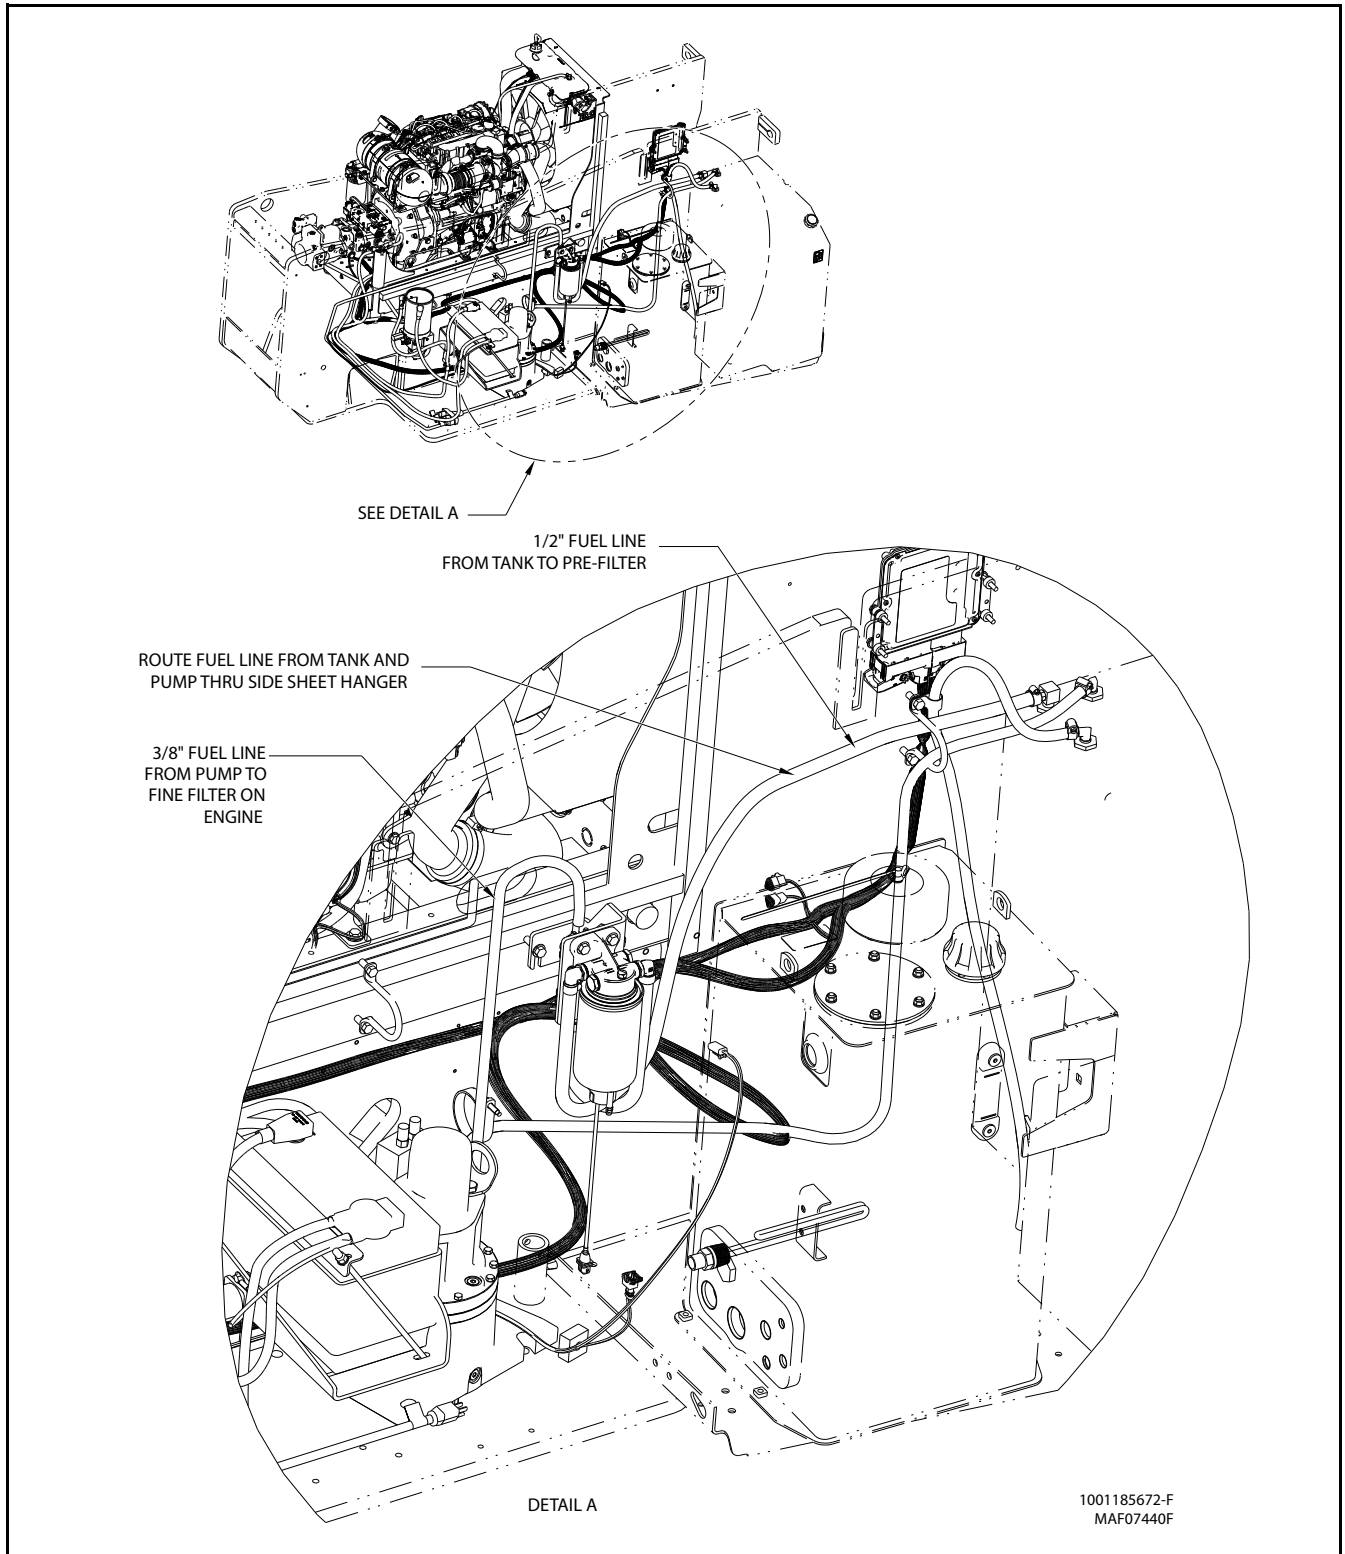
Deutz TD2.9L4 Engine Installation - Sheet 2 of 8
